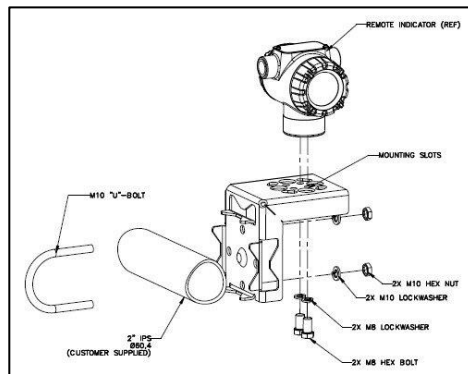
Pipe Mount - Horizontal Mounting Bracket
